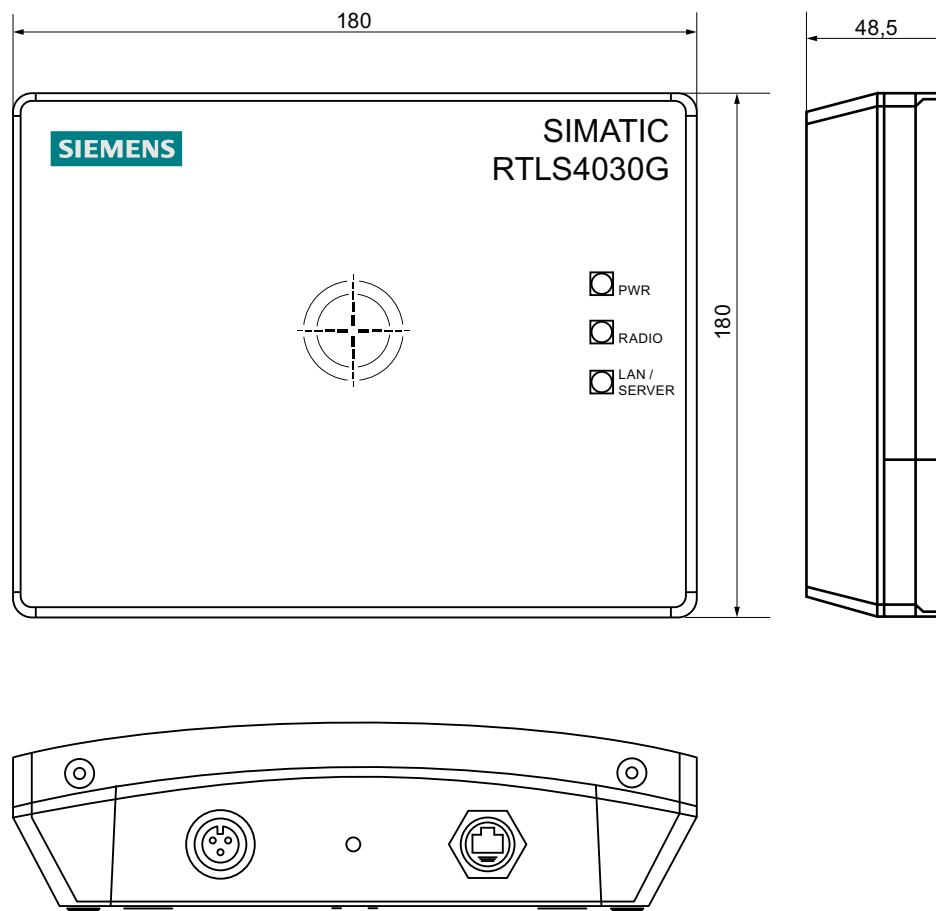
Dimension drawing SIMATIC RTLS4030G - All dimensions specified in millimeters
